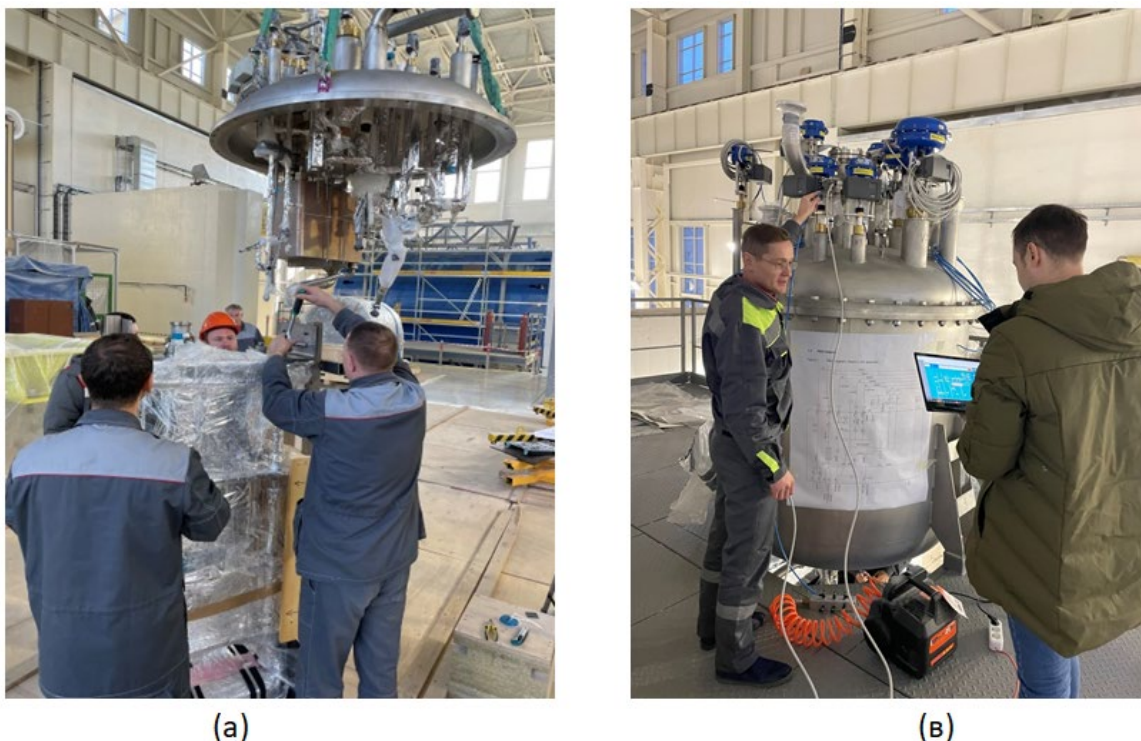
Assembly of components of the cryogenic solenoid system, where (a) is the assembly of the refrigerator, (b) is the assembly and testing of the control Dewar.
